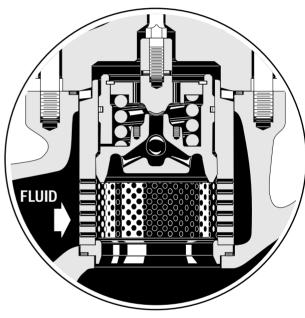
414•2 Model with LO-DB Cage 6" (150 mm) and Larger Valve Sizes
